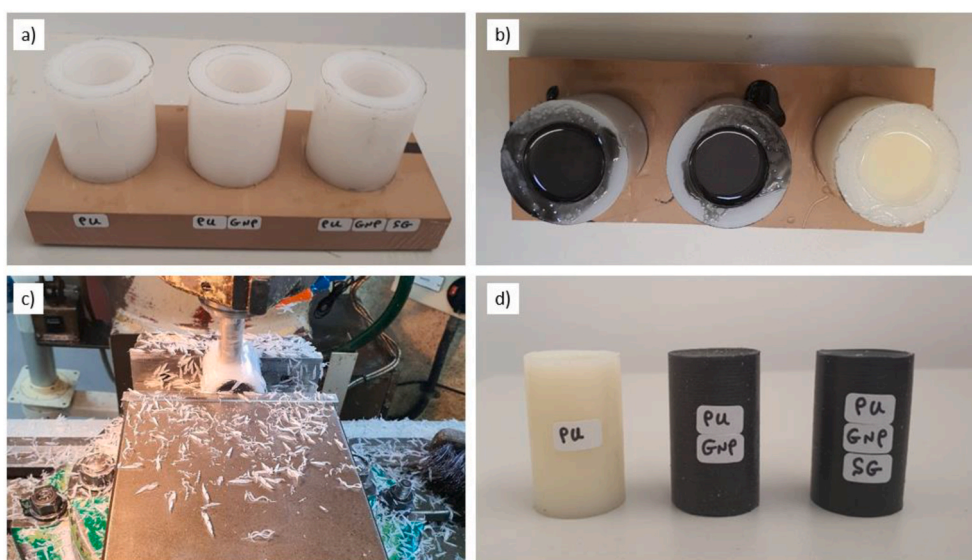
a) Manufactured mould for making specimens for drop ball test, b) pouring materials into the mould, c) using a milling machine for demoulding specimens, d) final specimens for testing.
